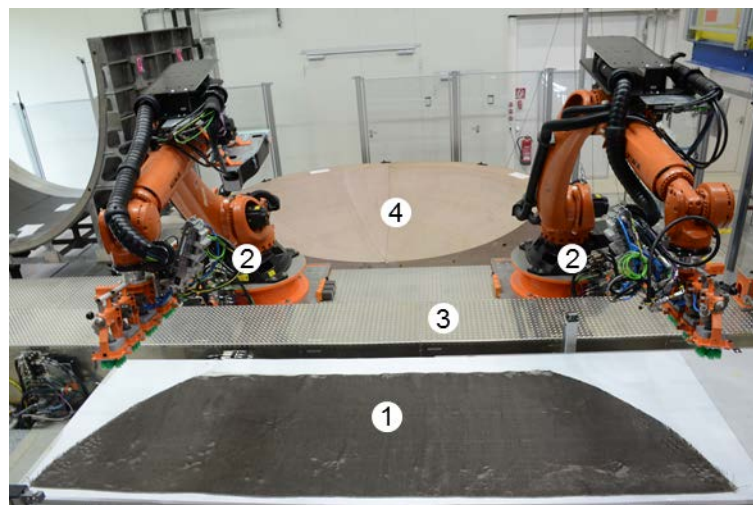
Test setup with pick-up table (1), robots and end-effectors (2), linear-axis (3) and mold (4)
